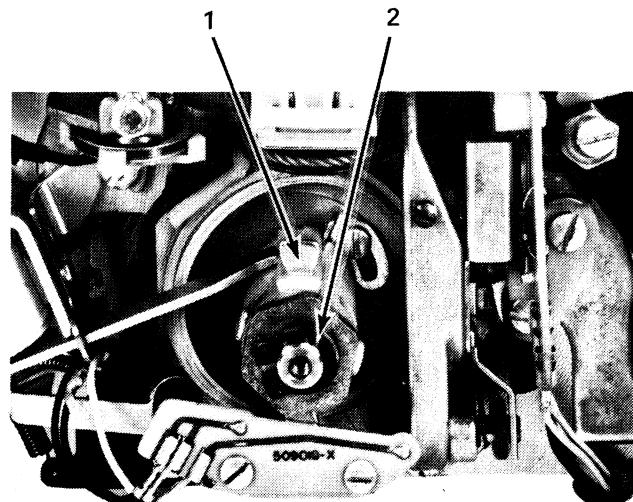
Shift Clutch Removal (Right Side of Printer)
